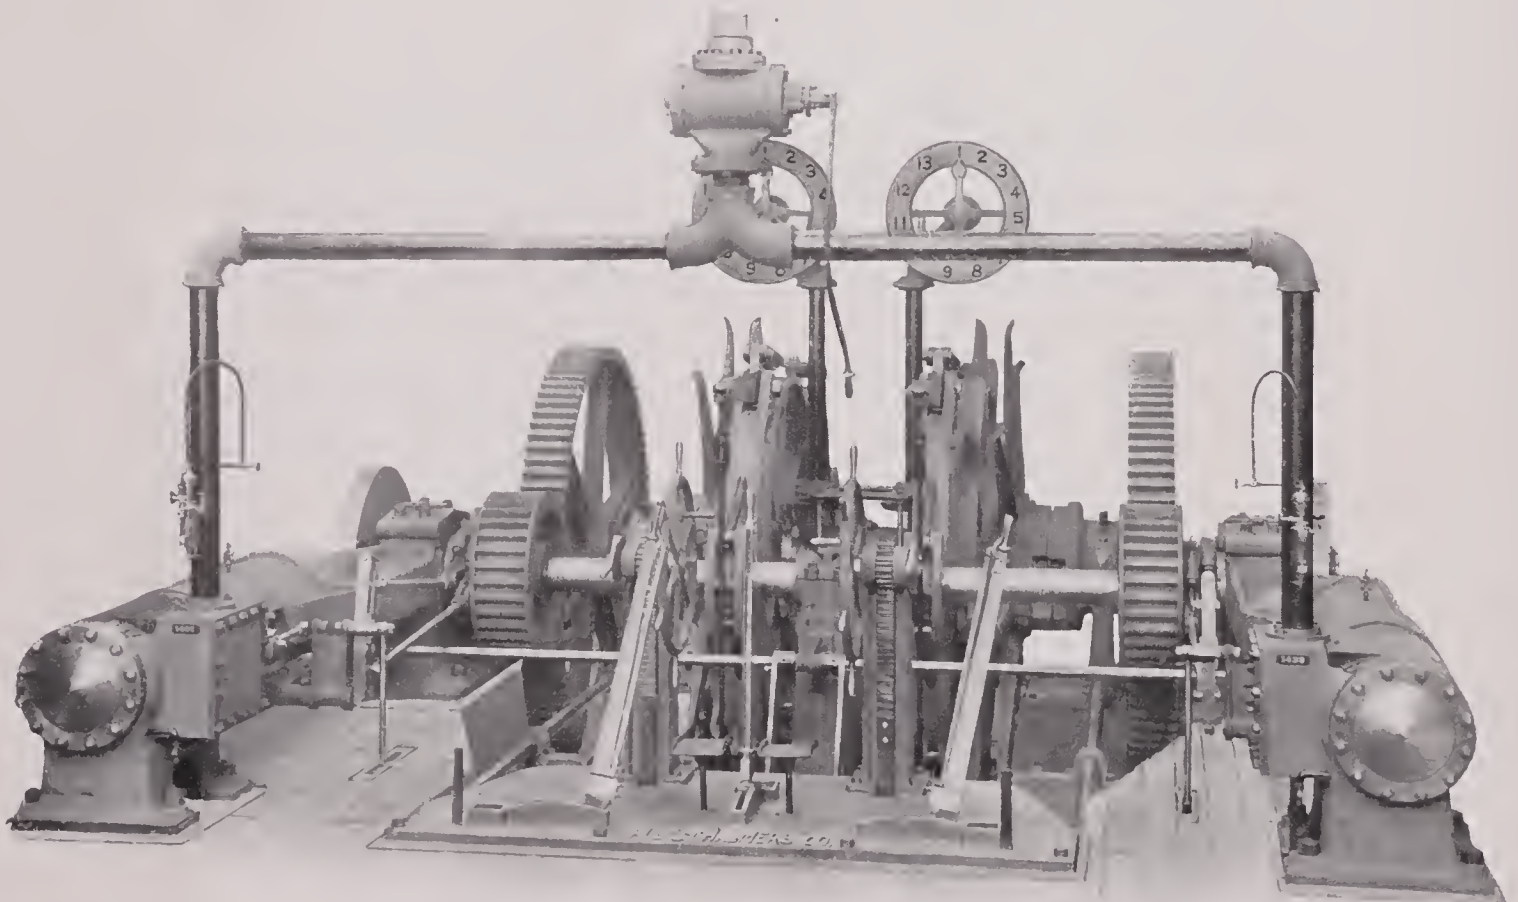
illustrates a Double Reel, Double Geared Hoisting Engine built for the Noriega Brothers.
